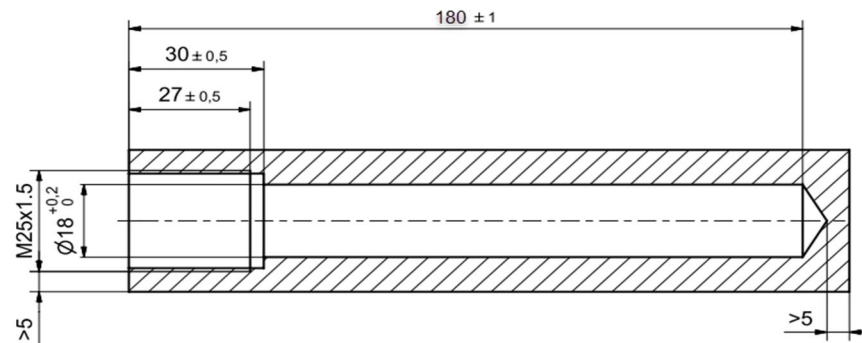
Dimensions of MYUB-PLUG drill hole
